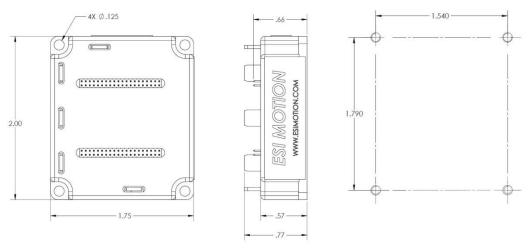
Single Axis Package Dimensions and Mounting Pattern (in)
